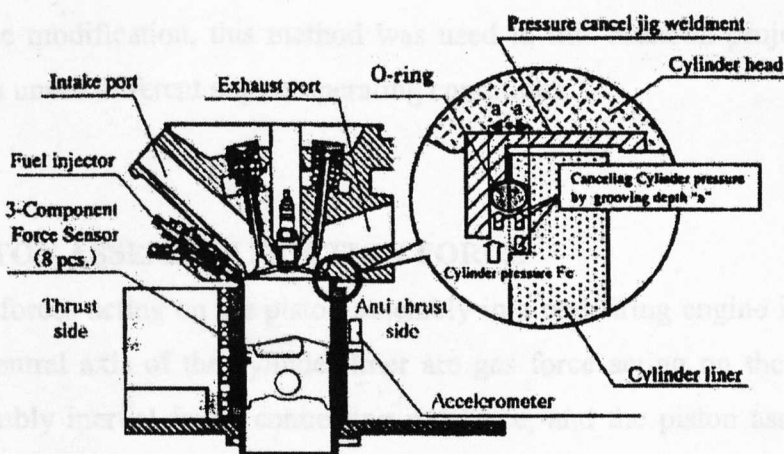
(b). Cross-section of the single cylinder experimental engine used by
